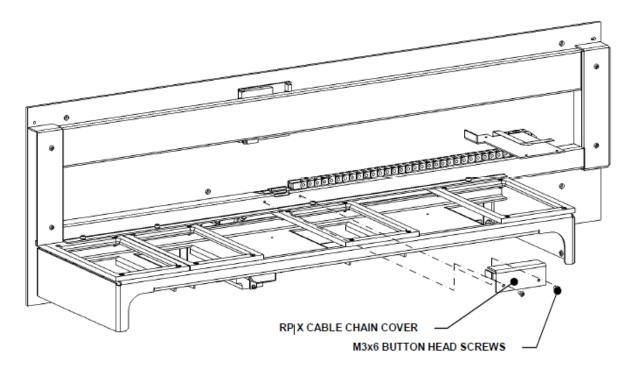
Removing the Reagent Pipettor X Drive Cable Chain Cover
